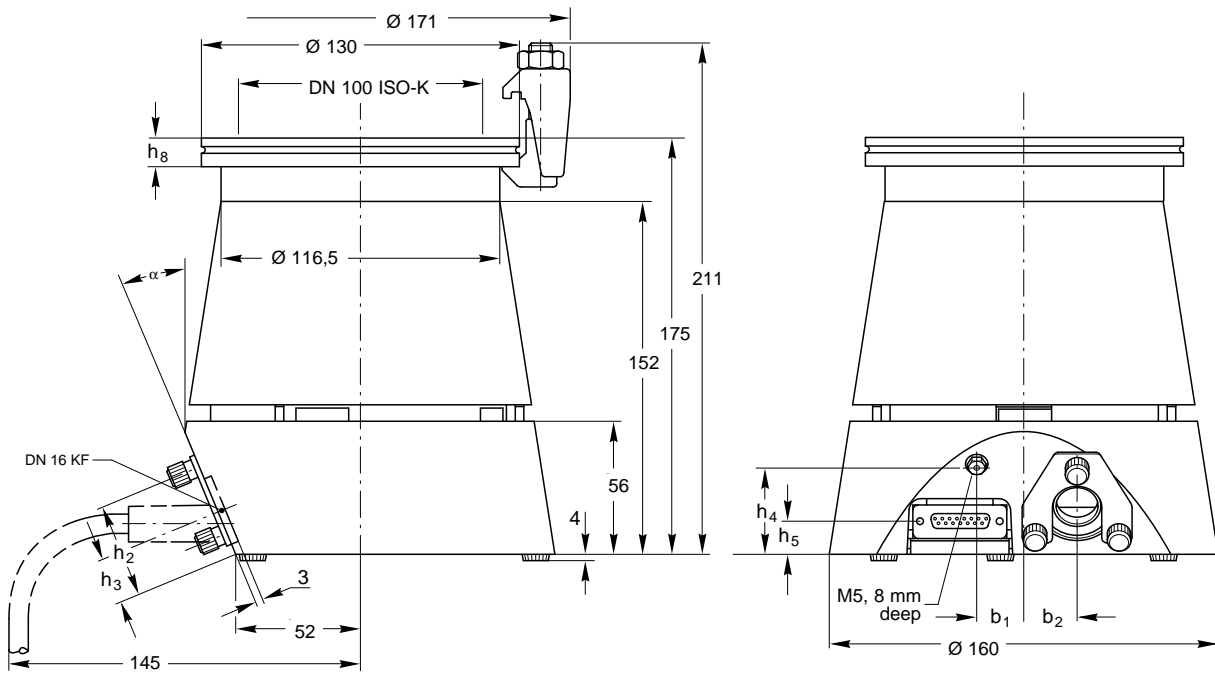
Dimensional drawing for the pump, dimensions in mm
